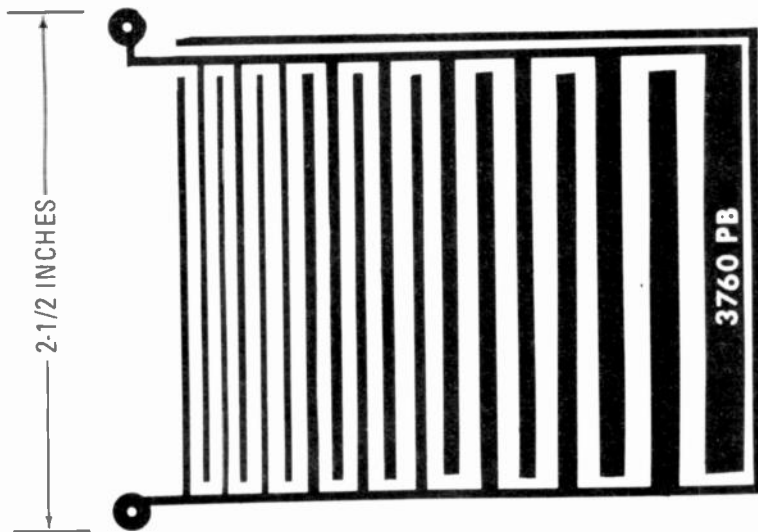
PITCH BENDER PC BOARD SHOWN FULL-SIZE.
